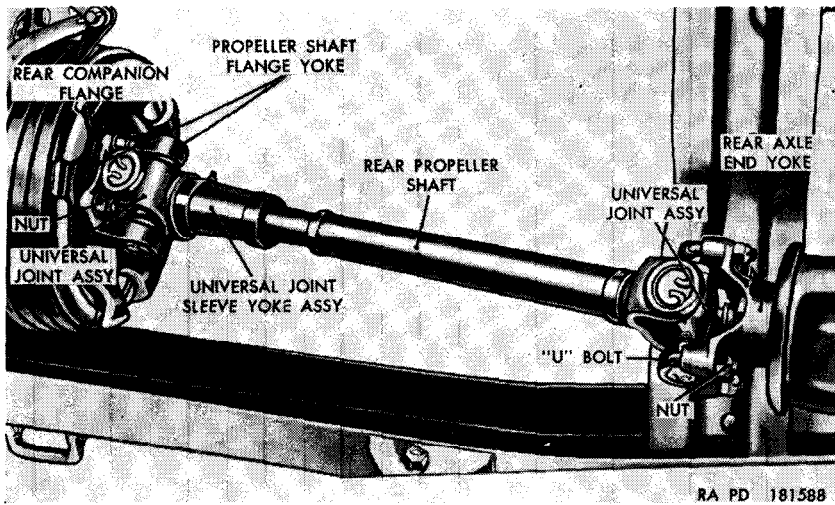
Rear propeller shaft with universal joint assemblies—installed.
